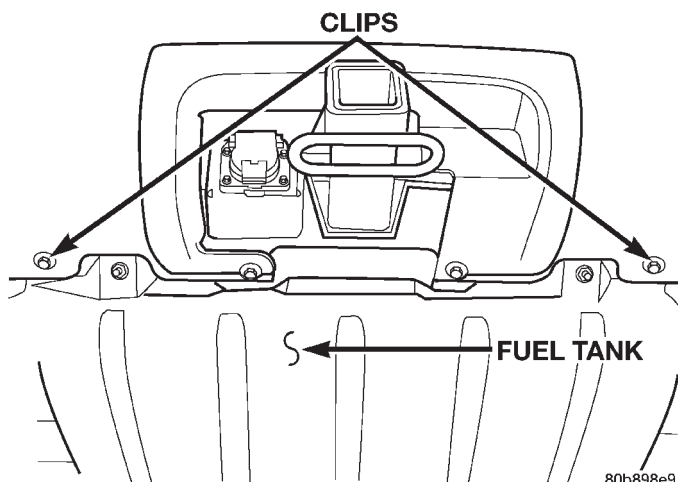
Fuel Tank-to-Rear Bumper Fascia Clips
